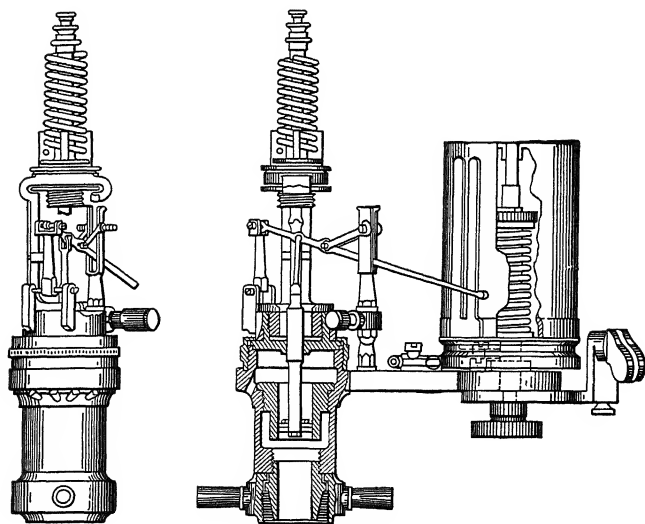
STAR INDICATOR WITH EXTERNAL SPRING.
